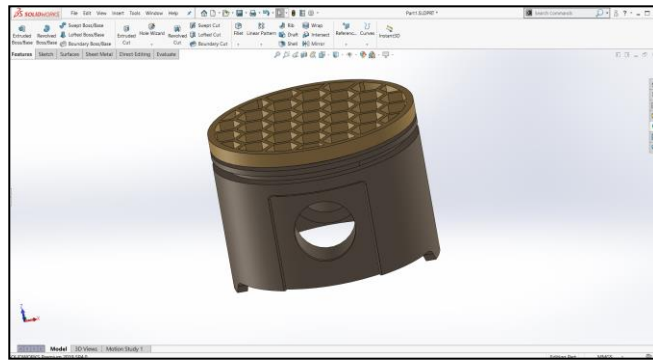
SOLIDWORKS model for Honeycomb piston.
